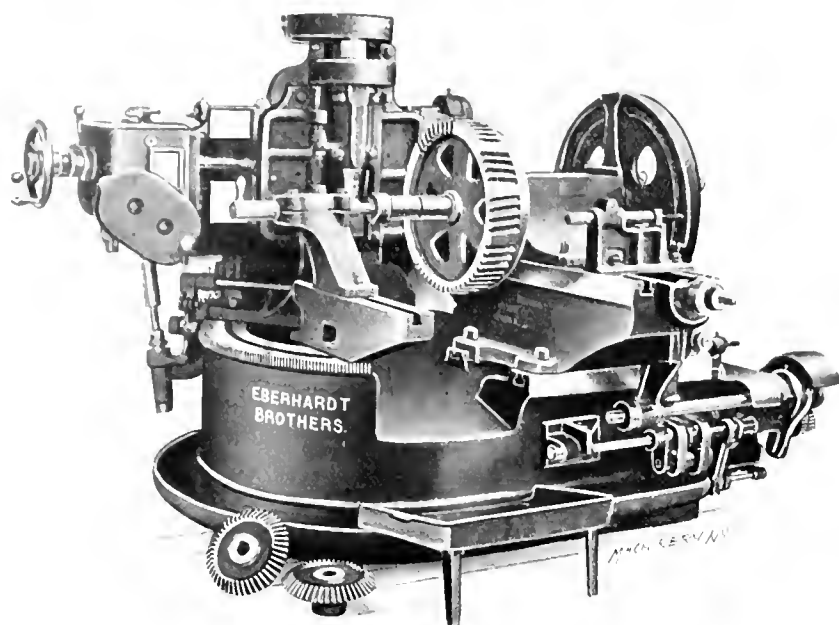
An Automatic Machine for Cutting Spur and Bevel Gears; also adapted for Worm, Skew, and Face Gears.
